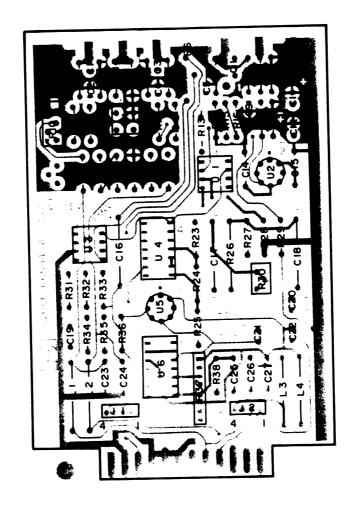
A4 I-Channel Amplifier Board Assembly Component Locations.
